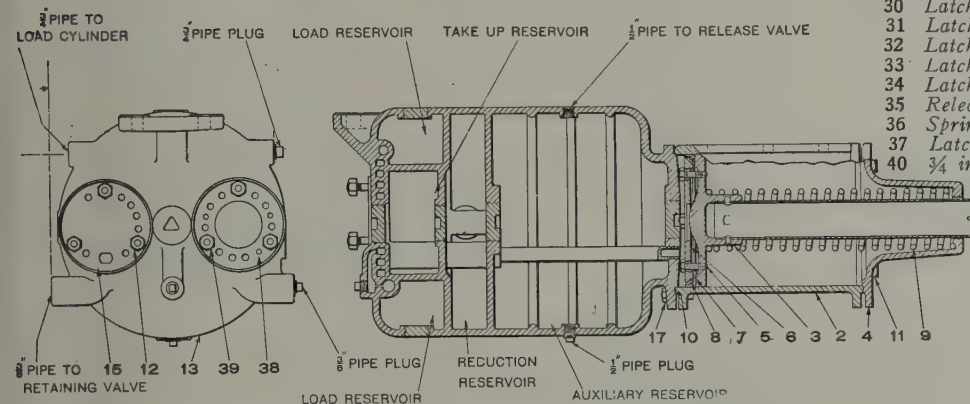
Empty Brake Cylinder, 10 in. by 12 in. and Four Compartment Reservoir Combined.
